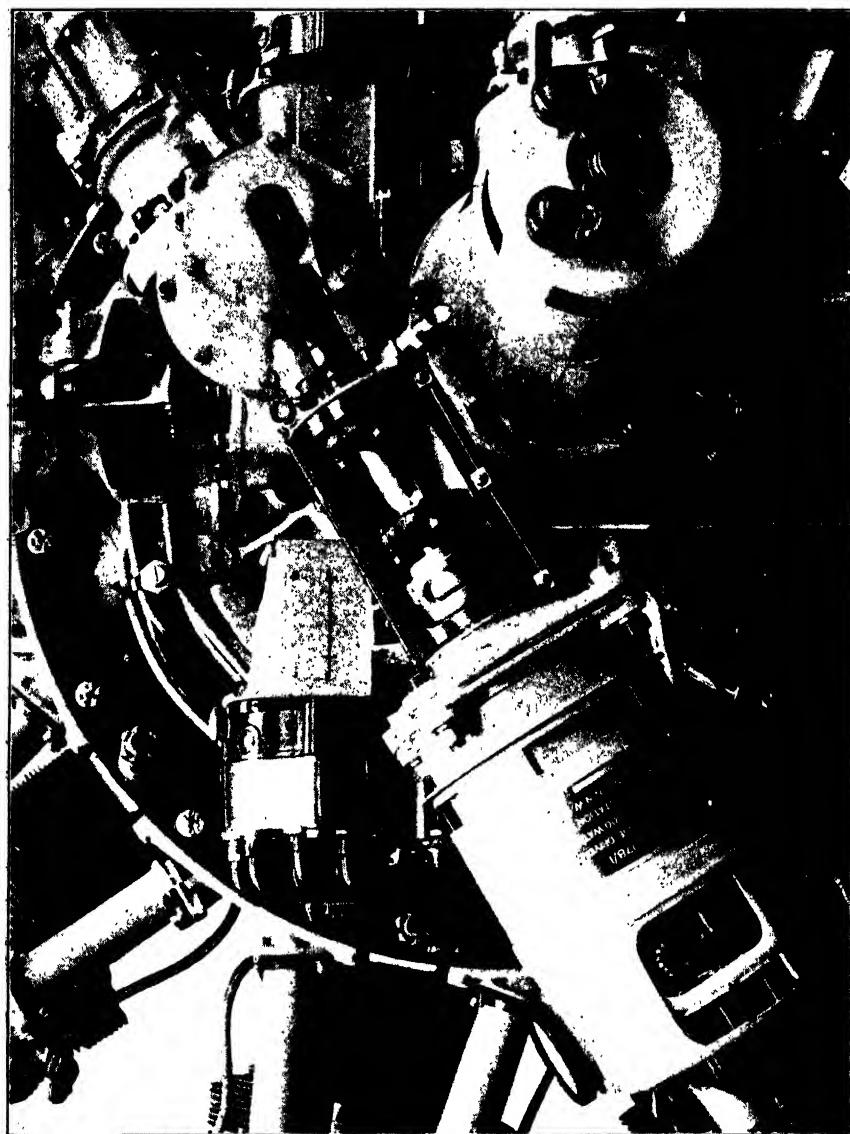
Rear Cover, showing Generator and Cardan Shaft Drive.
